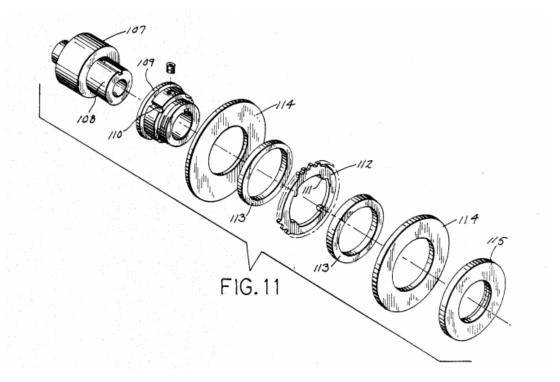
is an exploded view in perspective of the sprocket and one-way clutch assembly of the drive shaft of the second embodiment. *Id.* at 3:20–22.
